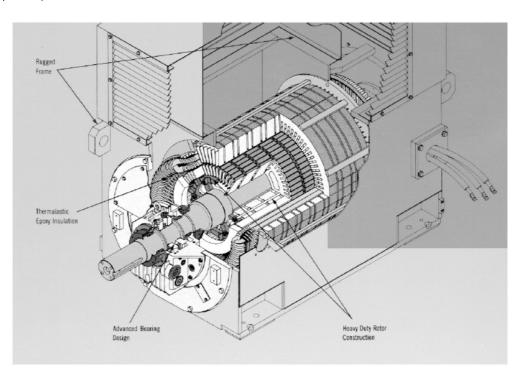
Two MW induction machine. (Source: Teco Westinghouse Motor Company)
